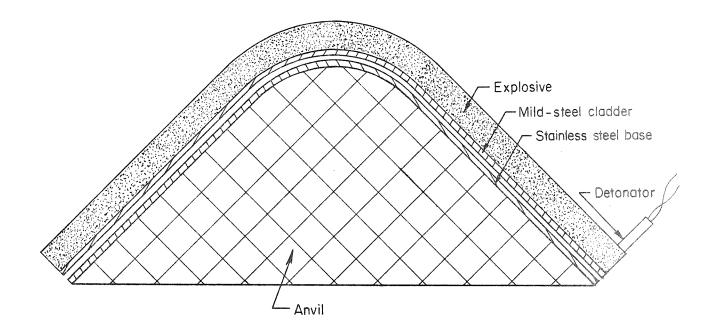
CURVED-PLATE WELDING ASSEMBLY
